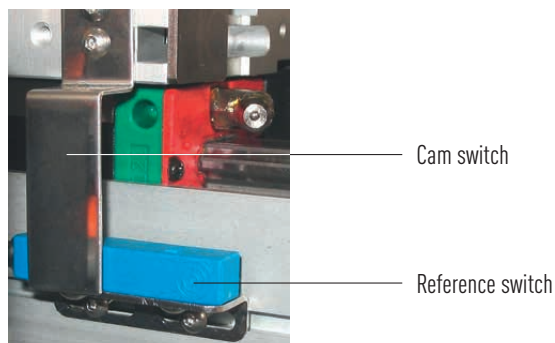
Reference switch and cam switch (linear motor axis)
